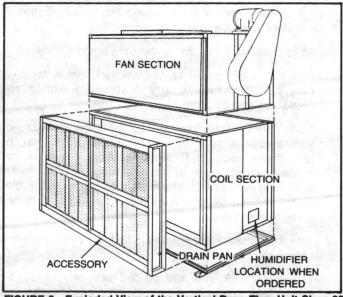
Exploded View of the Vertical Draw-Thru Unit Sizes 35 through 50
